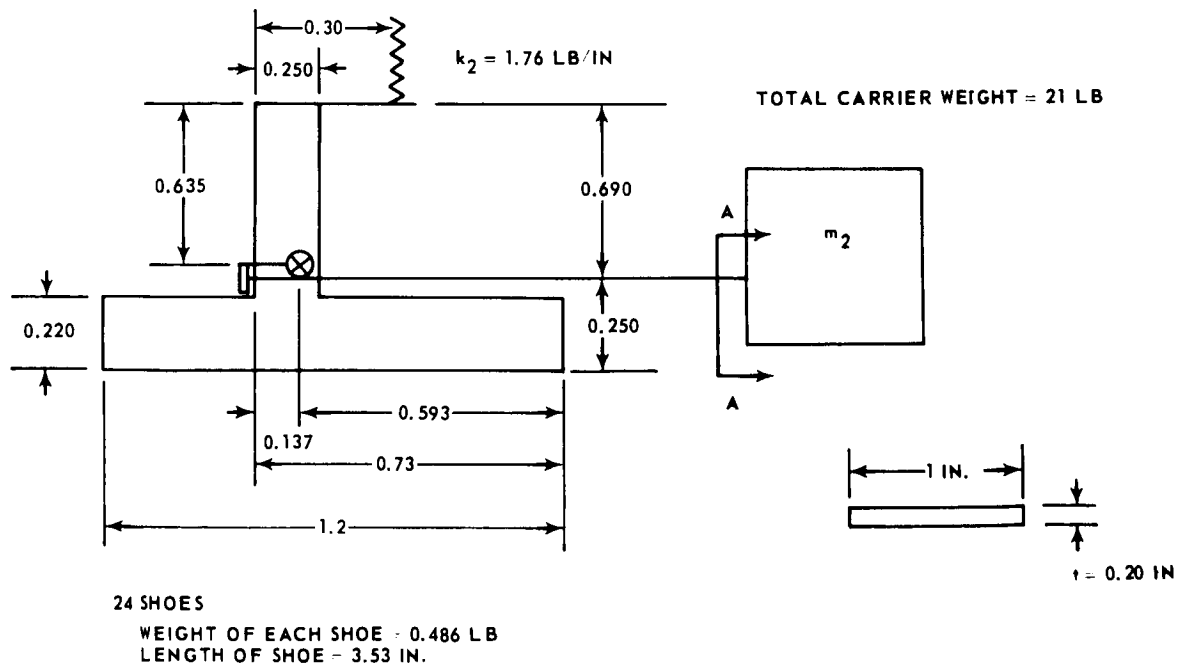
Dimensions of the Flexure-Mounted Shoe Seal
